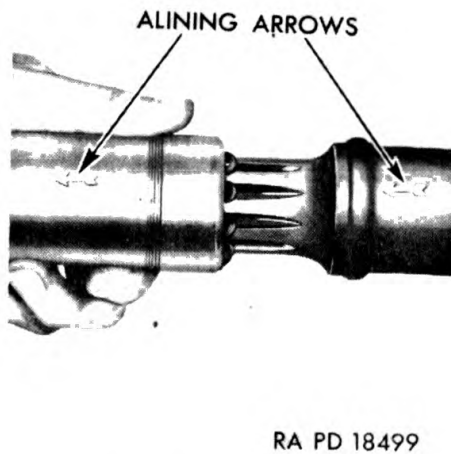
Alinement of Arrows on Front Propeller Shaft
